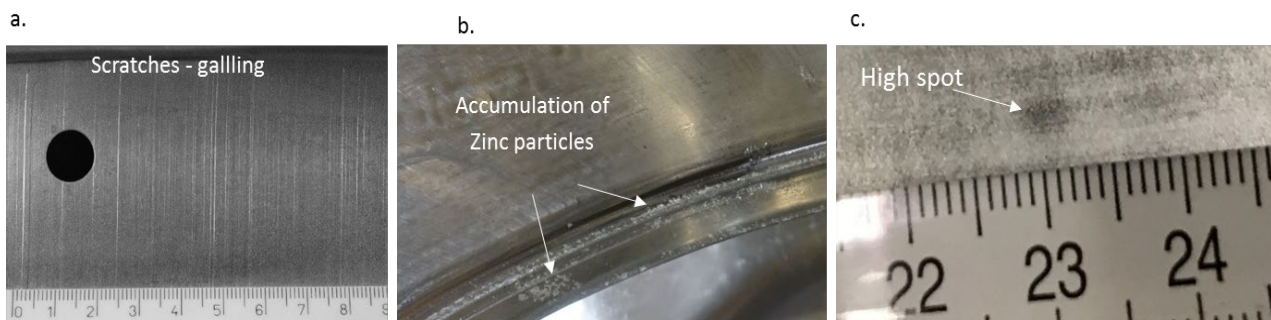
a. scratches on a GI coated part, b. coating accumulation on the die in the drawbead area, c. example of a high spot produced by a Zn flake.
